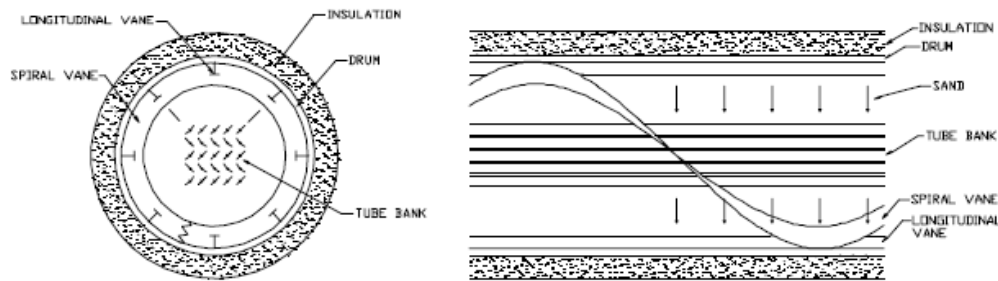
Cross Section and Profile Views of Details the Conveyor and Heat Exchange Drum in the Sand-Shifter TES System
